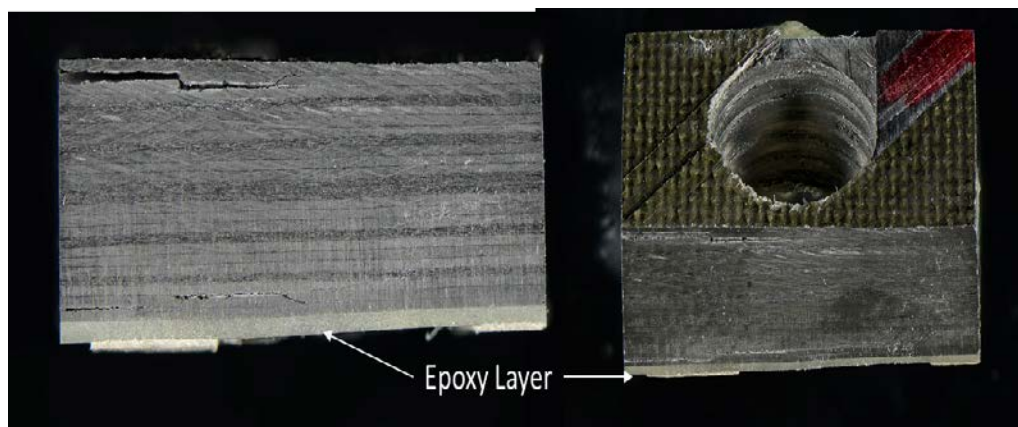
Filled-hole test specimen FHF-5 with silver epoxy bead conductive line after fatigue failure
